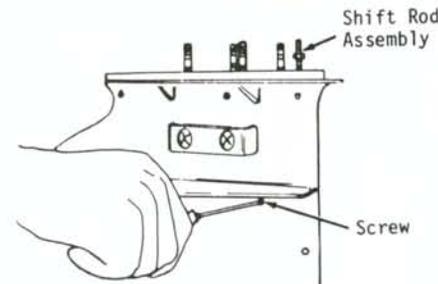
To remove lower shift rod assembly, remove screw securing shift rod guide holder and pull shift rod out top of gearcase.
